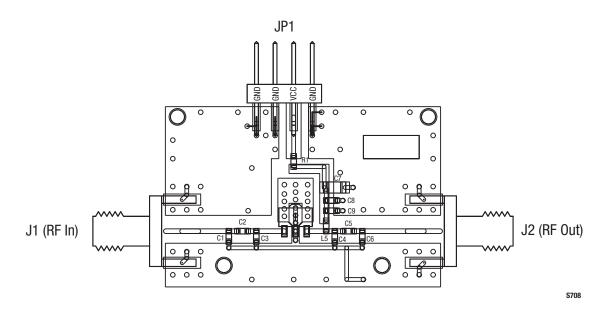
SKY65009 Evaluation Board Assembly Drawing
